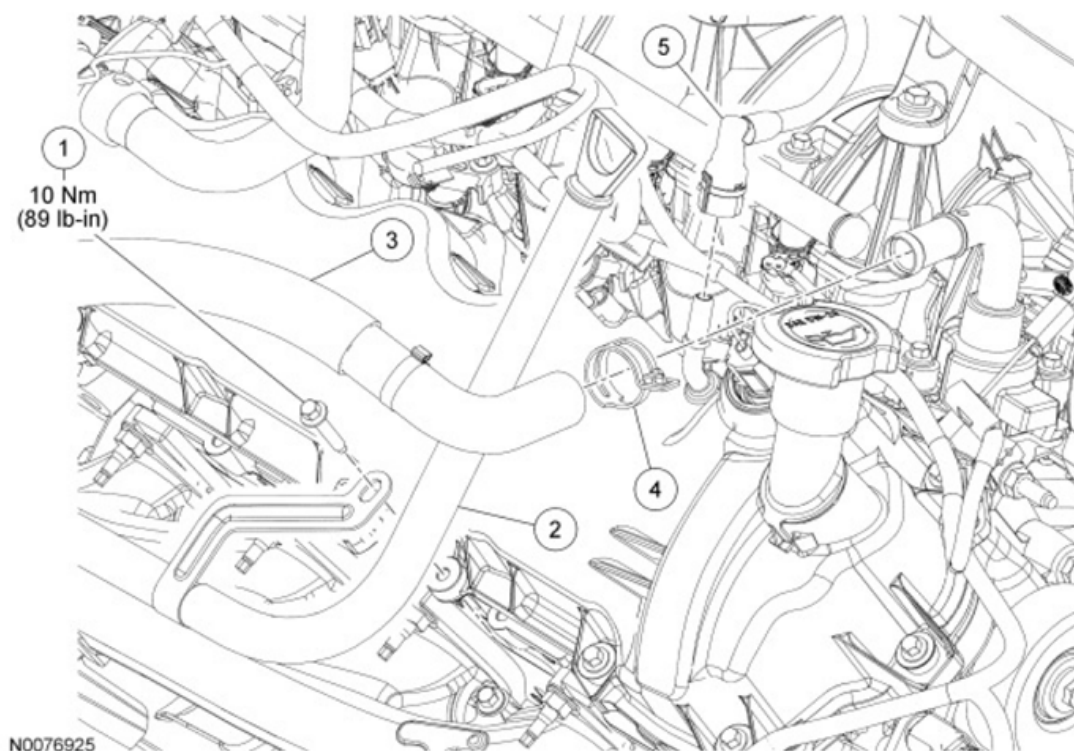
Identifying Transmission Fluid Level Indicator Tube, Crankcase Vent Tube And Coolant Hose With Torque Specifications
